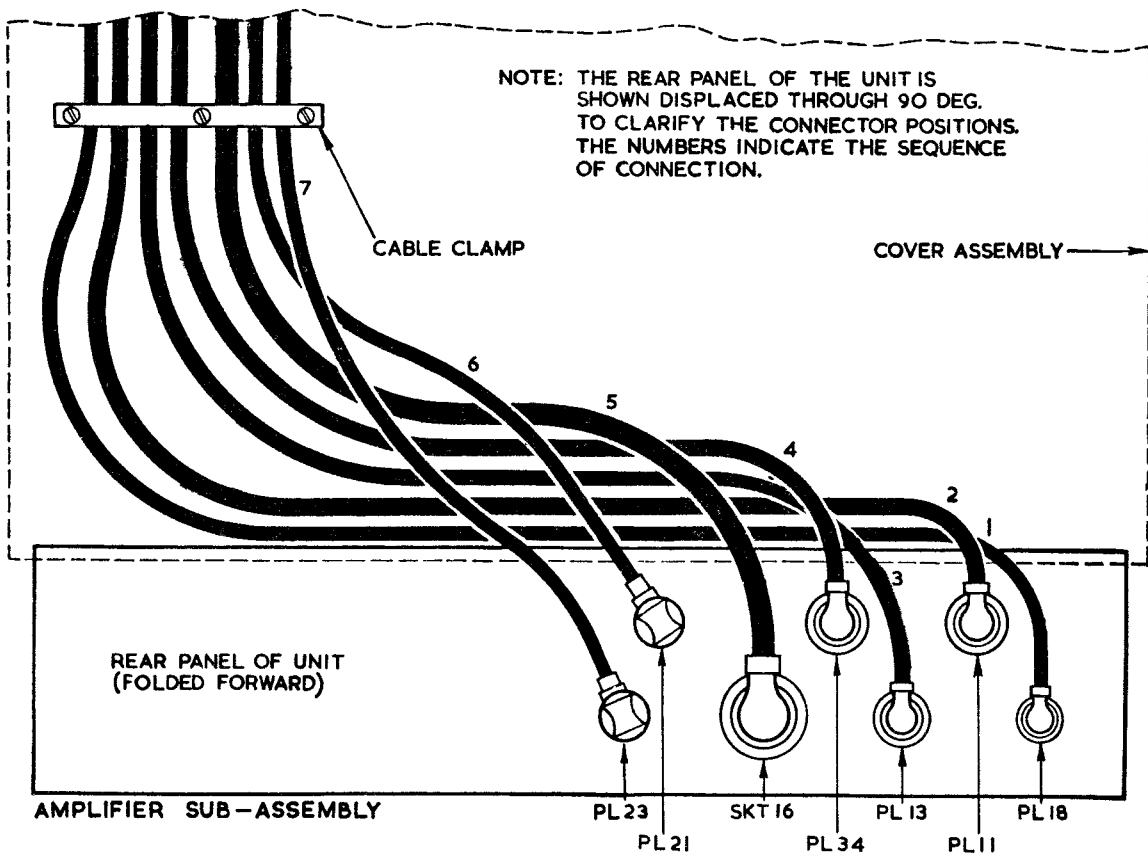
Layout of cable assembly 5995-99-932-4014 in cabinet
